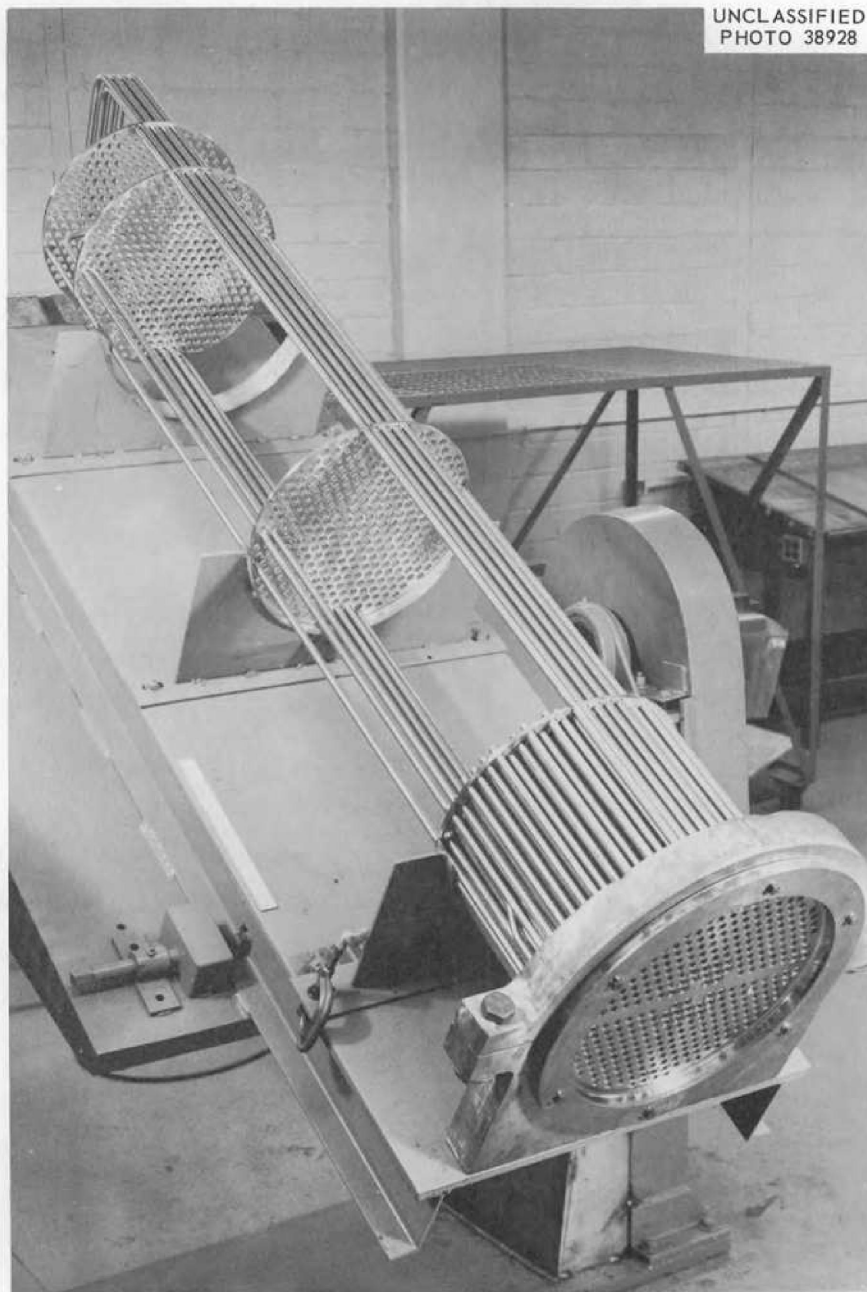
Completed Sample Heat Exchanger Positioned in Welding-
